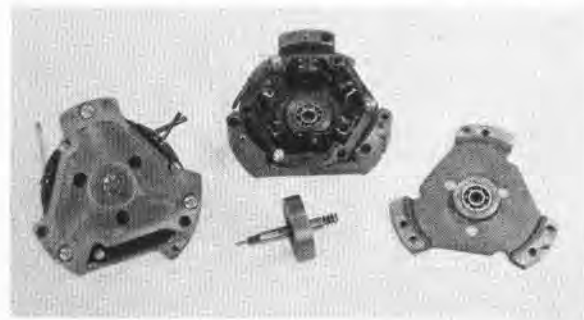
Production model six-coil generator and principal components. Assembled generator is shown at left. Rotor, mounted stator, and cover plate are shown at right.
